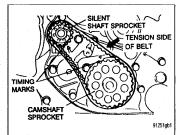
Silent shaft sprocket alignment marks for belt replacement—1.8L and 2.0L SOHC engines
